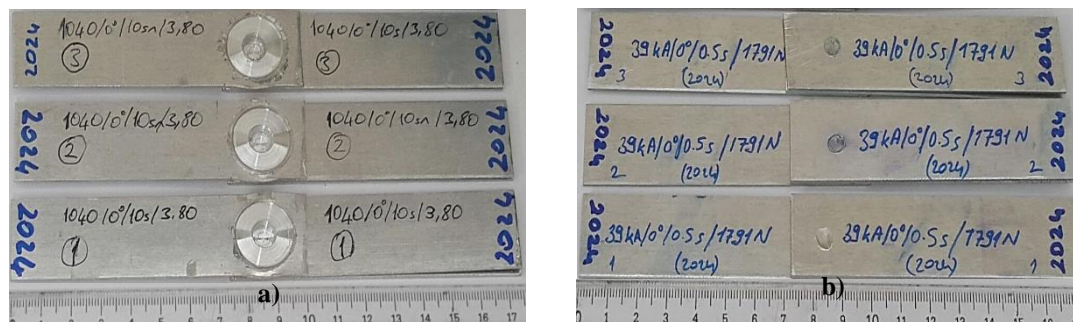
Lap-shear tensile tests specimens: a) Before test of FSSW specimens; b) Before test of ERSW specimens.
